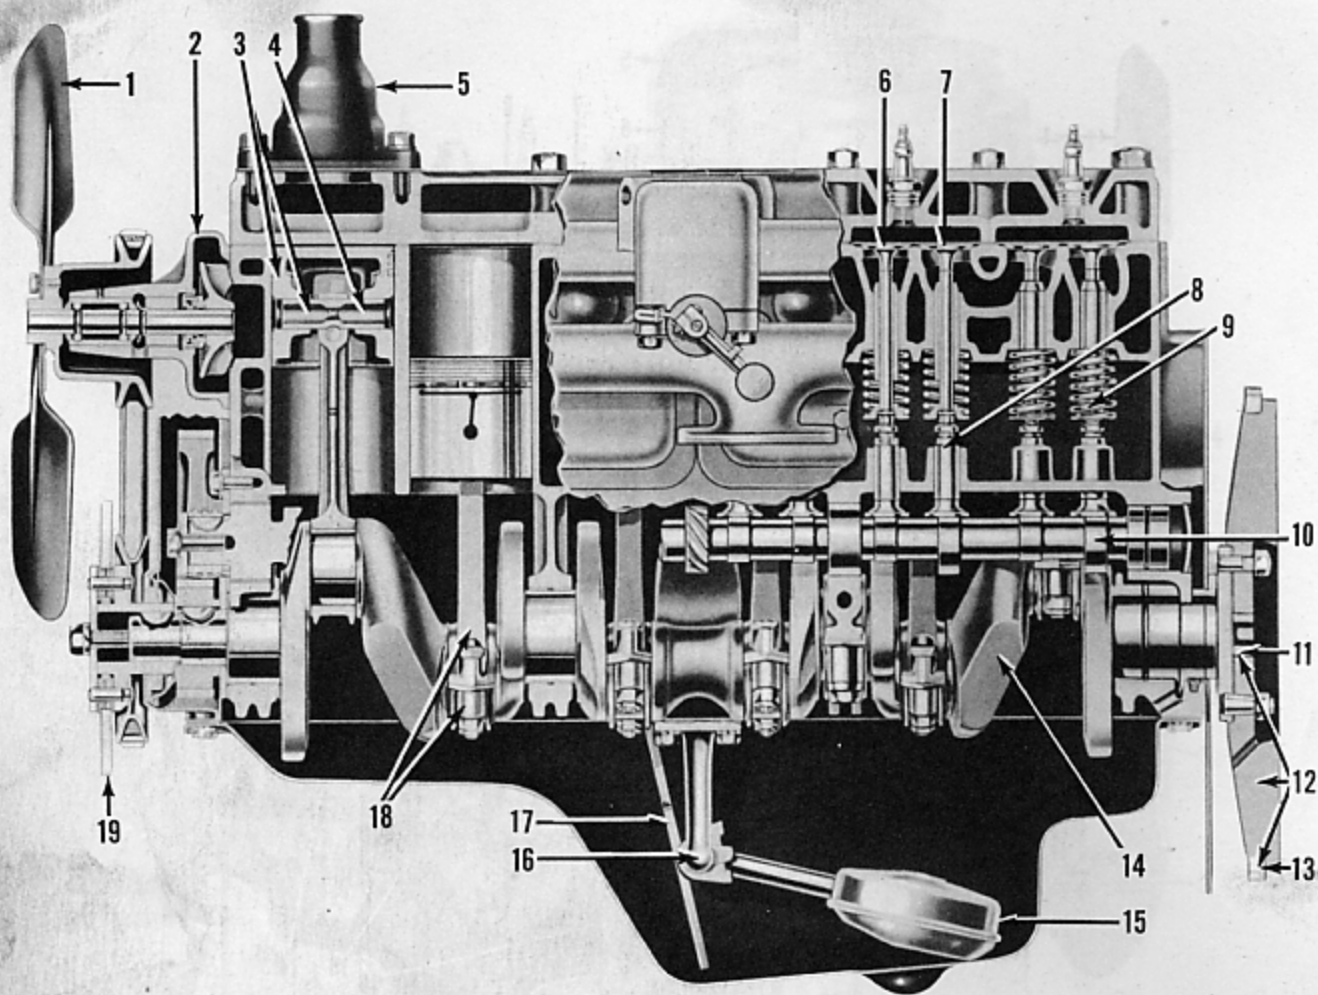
SECTIONAL VIEW OF ENGINE—LEFT SIDE—6 CYLINDER
